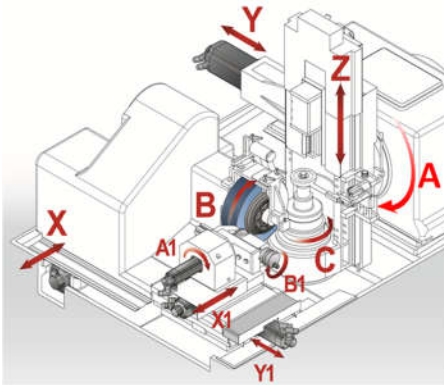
CNC Continuous Gear Grinding Machine [5]
